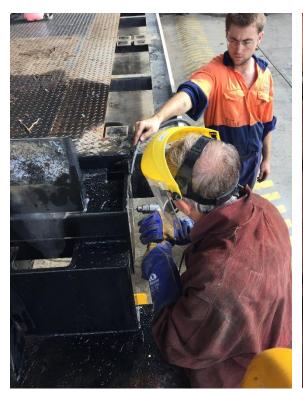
Vent holes being drilled in end of rear jackleg tube
